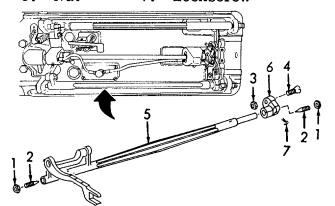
Feed Lifting Hook Shaft, Removal.
